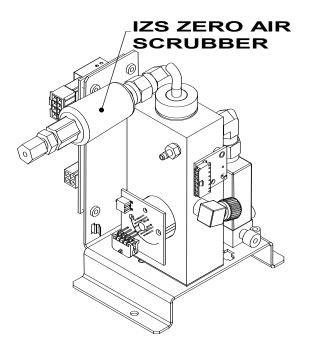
IZS O₃ Generator Zero Air Scrubber Location
